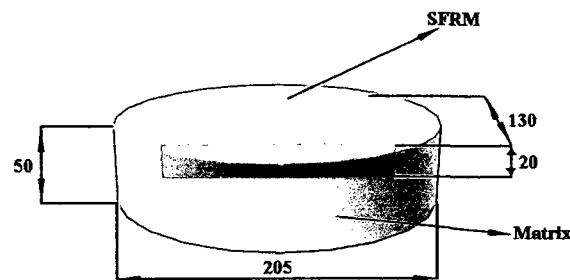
SFRM and Matrix plate after squeeze casting.
